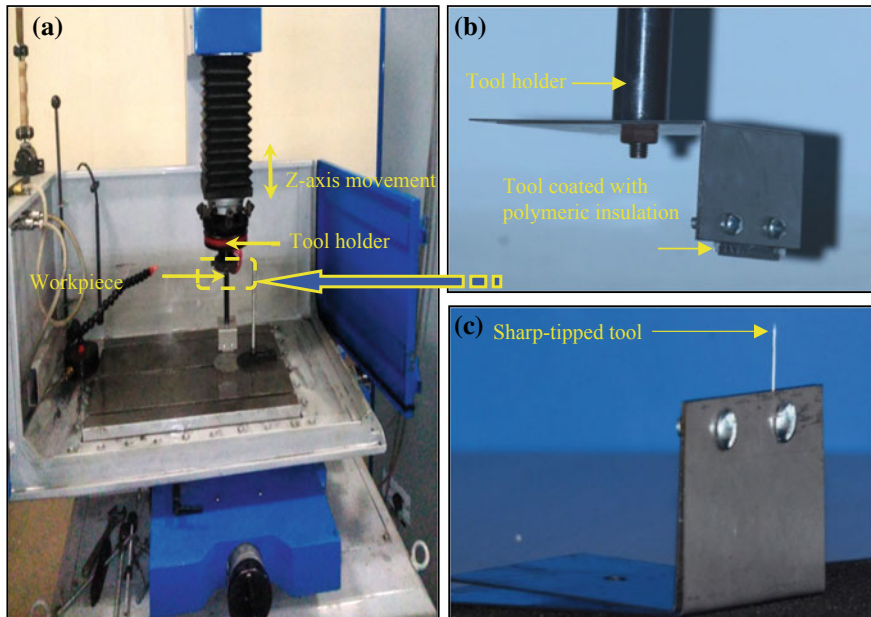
a Overview of experimental setup, b tool holding assembly with polymeric insulated tool for micro-channels, and c sharp-tipped tool for fabrication of micro-holes
